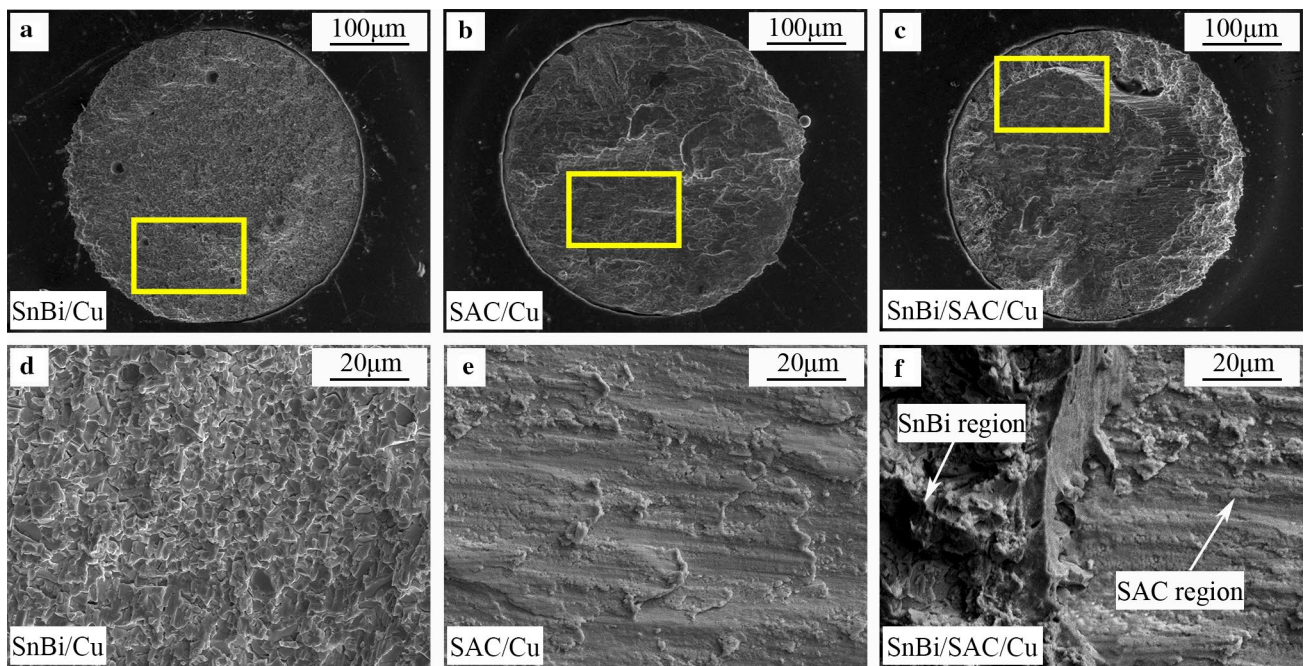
The morphology of the shear fracture of three kinds of solder joints. a SnBi/Cu, b SAC/Cu, c SnBi/SAC/Cu, d magnified area in (a), (e) magnified area in (b), (f) magnified area in (c)
